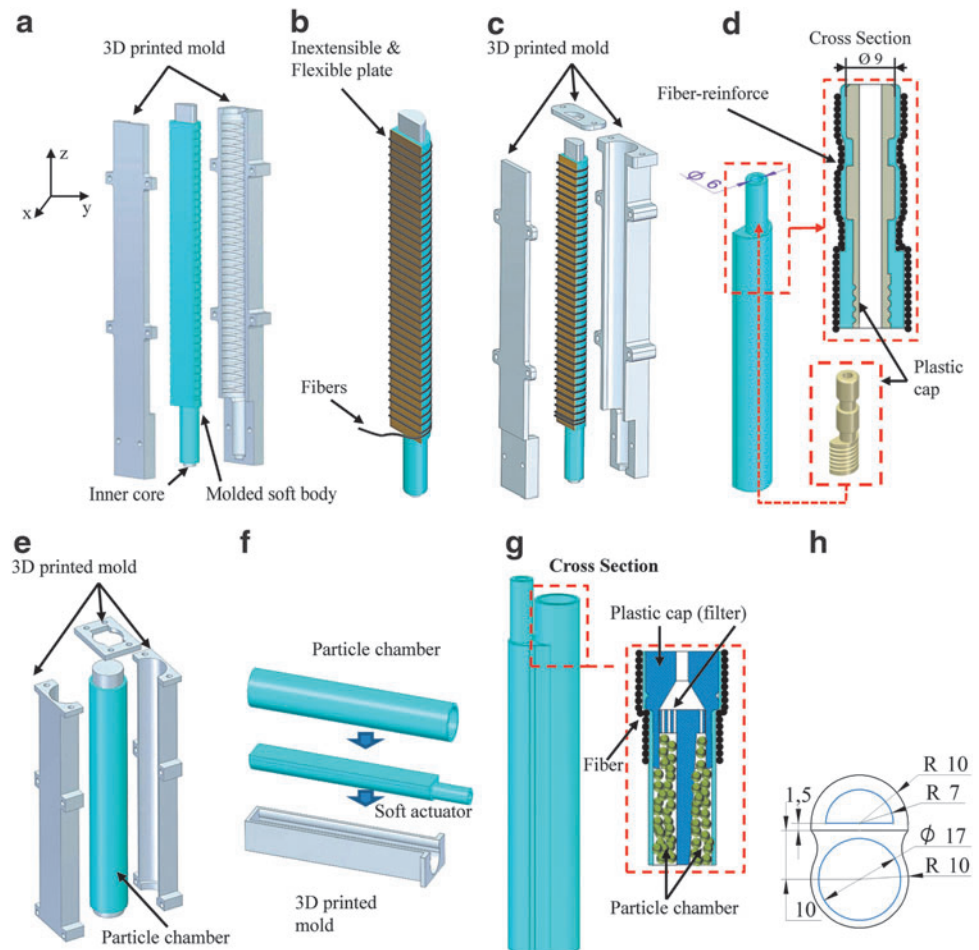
Manufacturing process of a soft finger. (a) Molding the first layer. (b) Attaching inextensible plate and reinforcing by fibers. (c) Recasting. (d) Sealing. (e) Molding the membrane of particle sac. (f) Assembly. (g) Filling particles and capping. (h) Size details of cross section. Color images available online at www.liebertpub.com/soro
